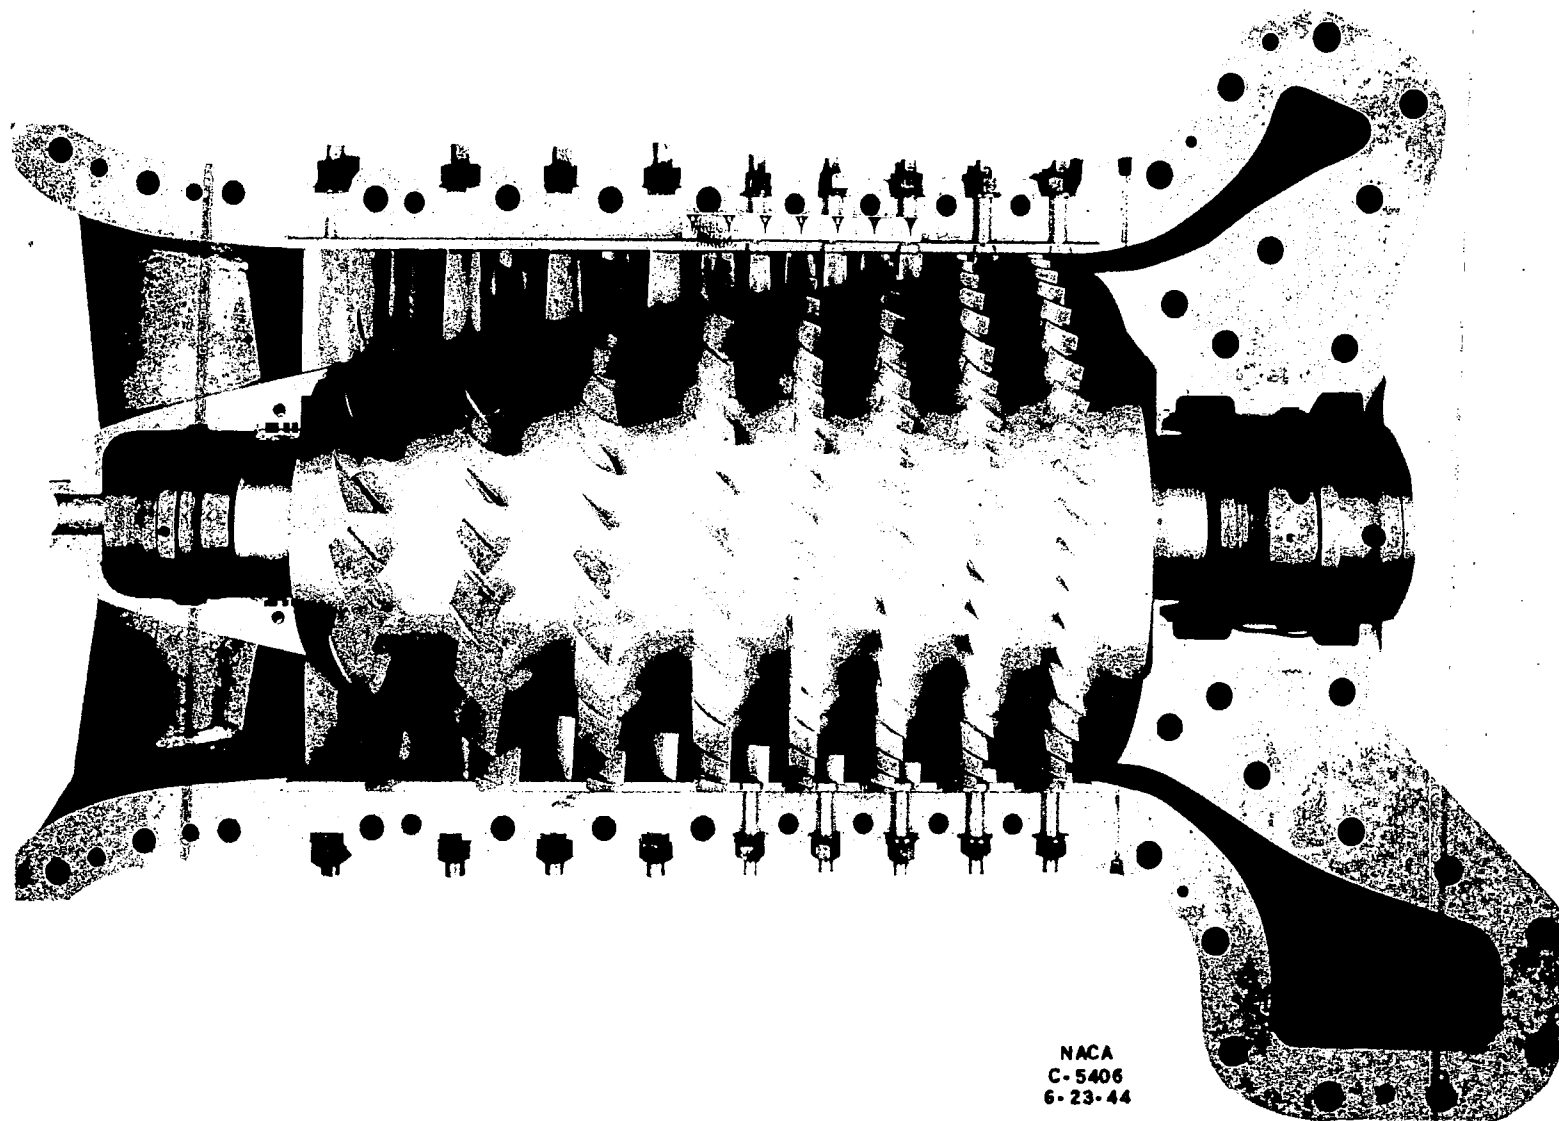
NACA eight-stage axial-flow compressor with upper half of casing removed.
